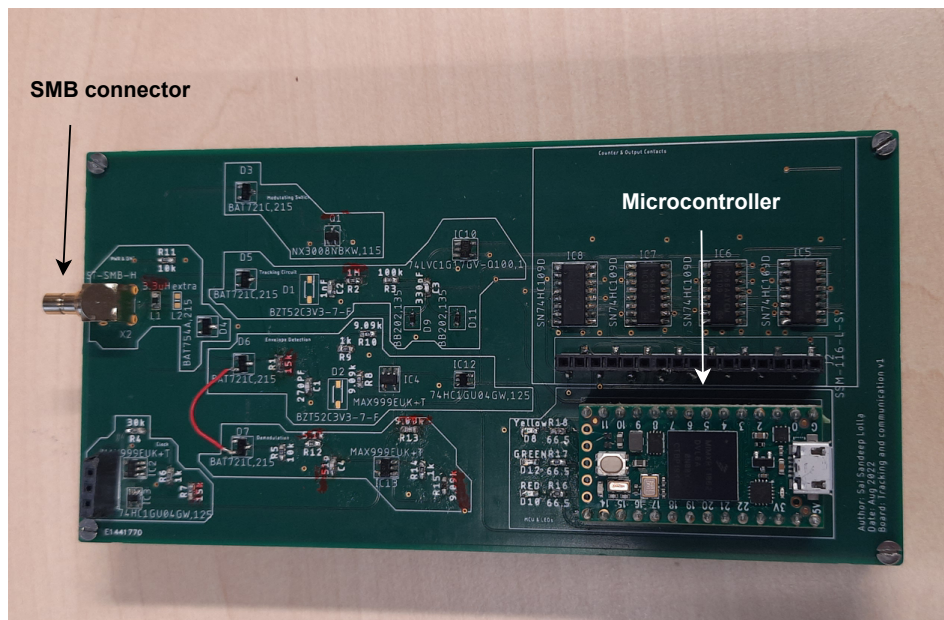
PCB developed using the circuit discussed in Section 3.3.
